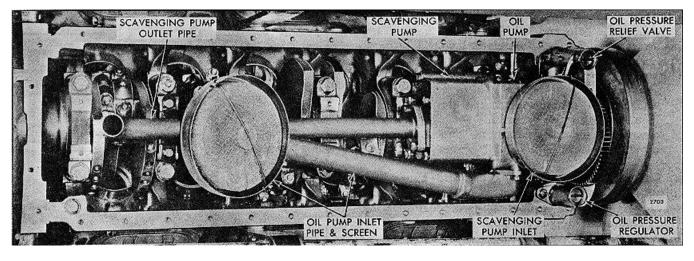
Typical Lubricating Oil Pump Mounting (12V Engine)
